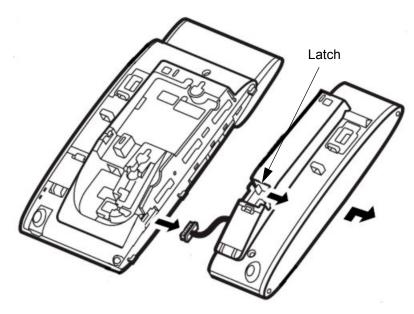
Bottom of Multiline Terminal (Legs Removed)
